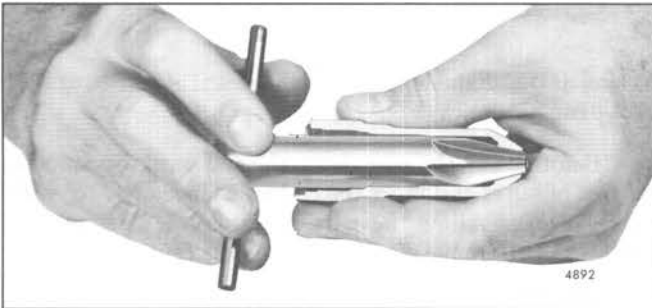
Cleaning Injector Nut Lower End with Tool J 9418-5
